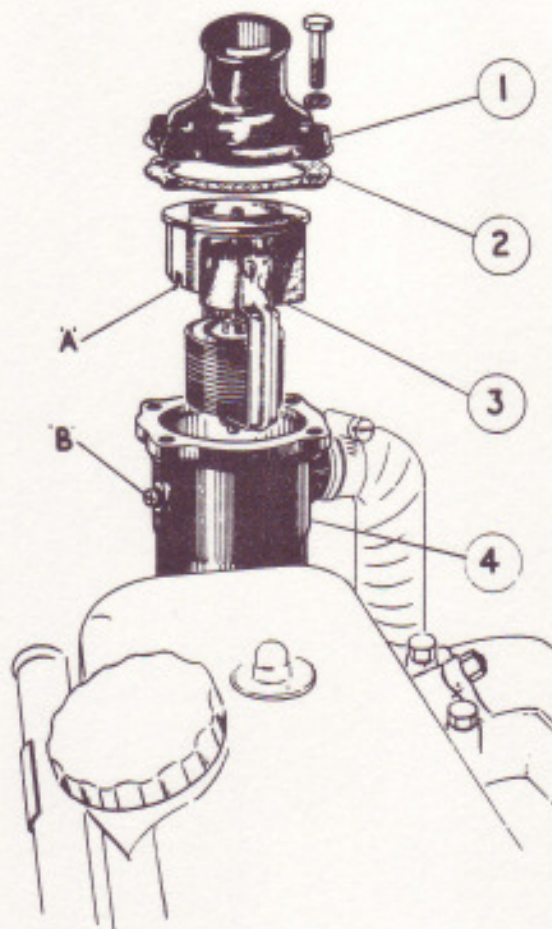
THERMOSTAT UNIT "EXPLODED" FROM ITS HOUSING.
